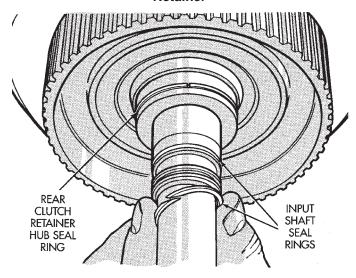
Pressing Input Shaft Out Of Rear Clutch Retainer
